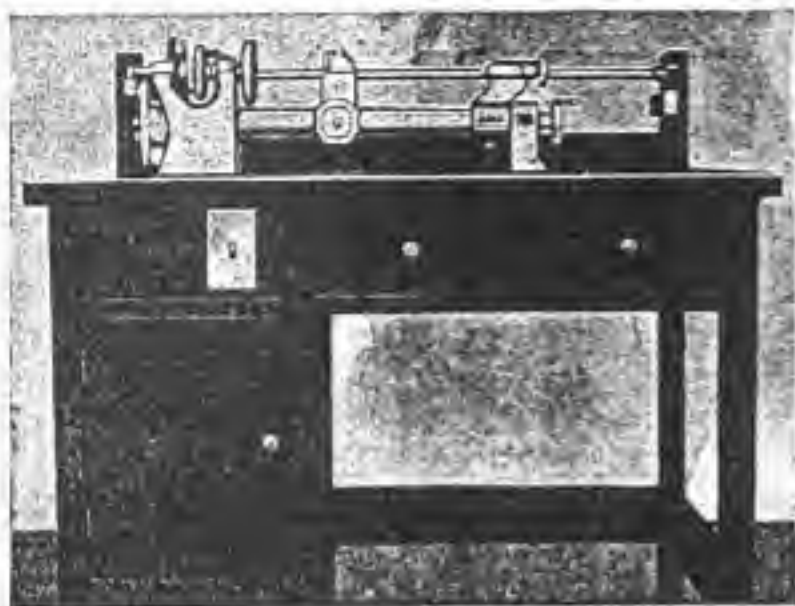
The compactness and beauty of this bench lathe table are achieved by eliminating the usual overhead countershaft. There is room at the right end for a small drill or grinder.
